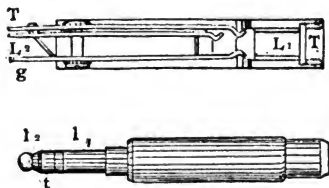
JACK AND PLUG OF THREE-WIRE SWITCHBOARD.
